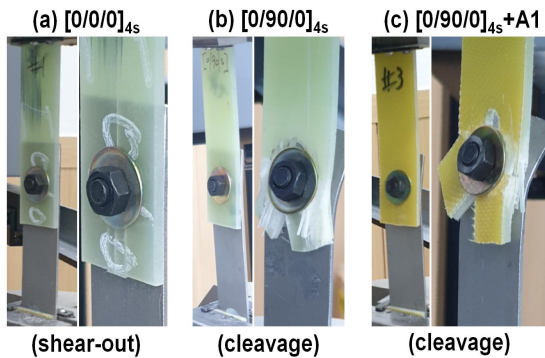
Test specimen and failure configuration for bolted single lap-shear joint test
